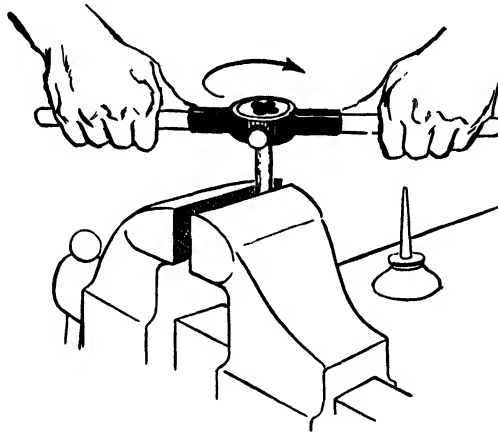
Be sure to start the die straight, exerting equal pressure on the two handles.
